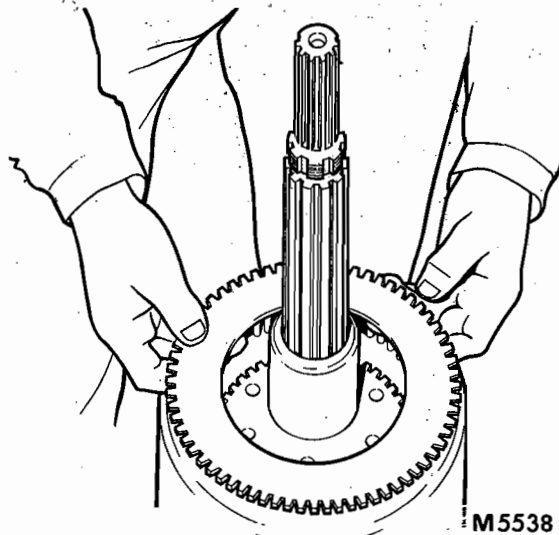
FITTING TOP SPEED CLUTCH PLATES
